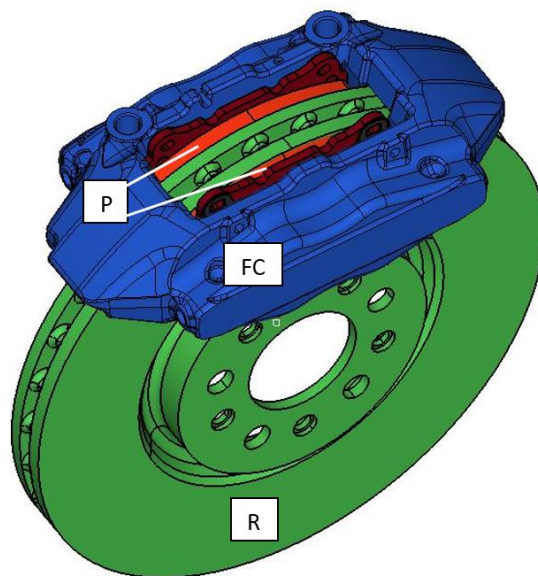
Schematic of the disc brake assembly: (R) cast iron rotor; (FC) aluminium fixed calliper; (P) low steel brake pads.
